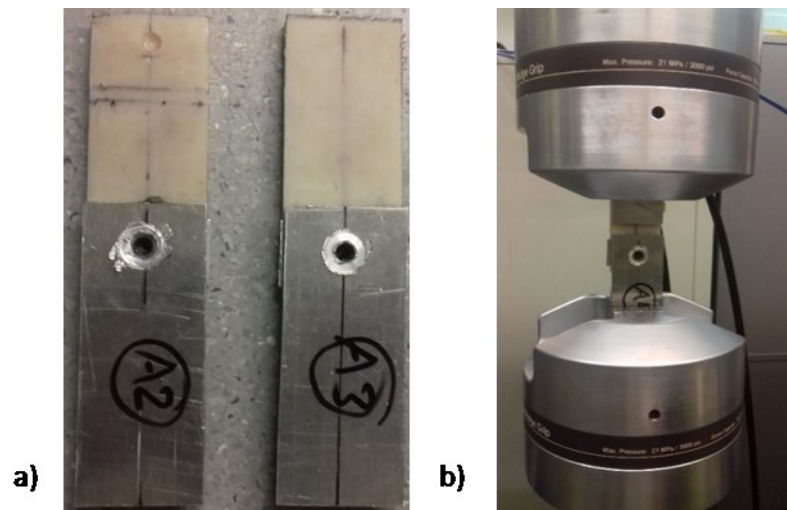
a) Tensile-Shear Test Specimen, b) Test Specimen in the MTS 810 Landmark Machine
